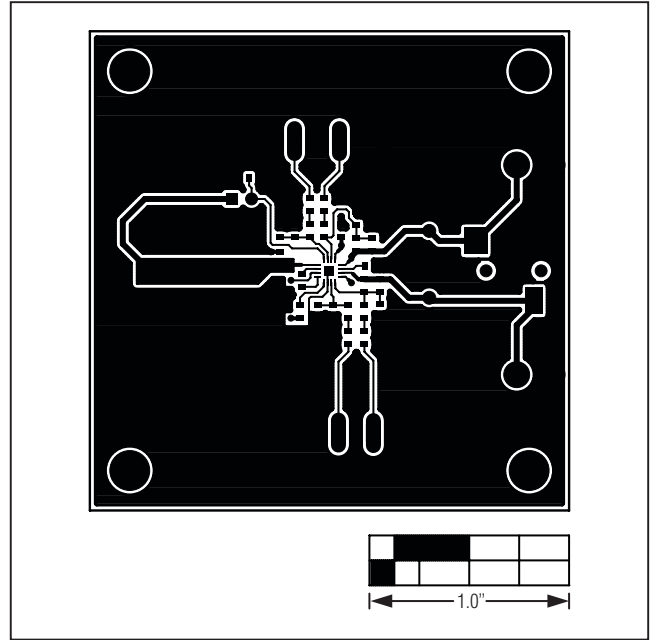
MAX97220A EV Kit PCB Layout—Component Side
